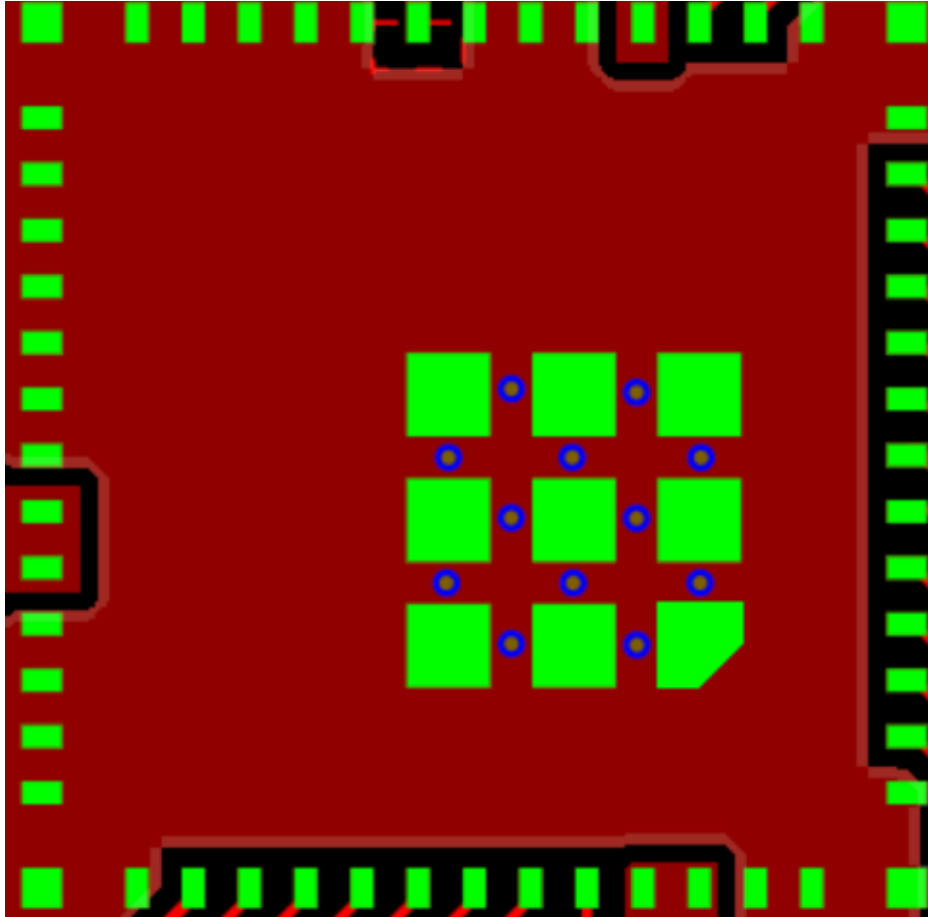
Block of Ground Pads on the Bottom Side of Package
